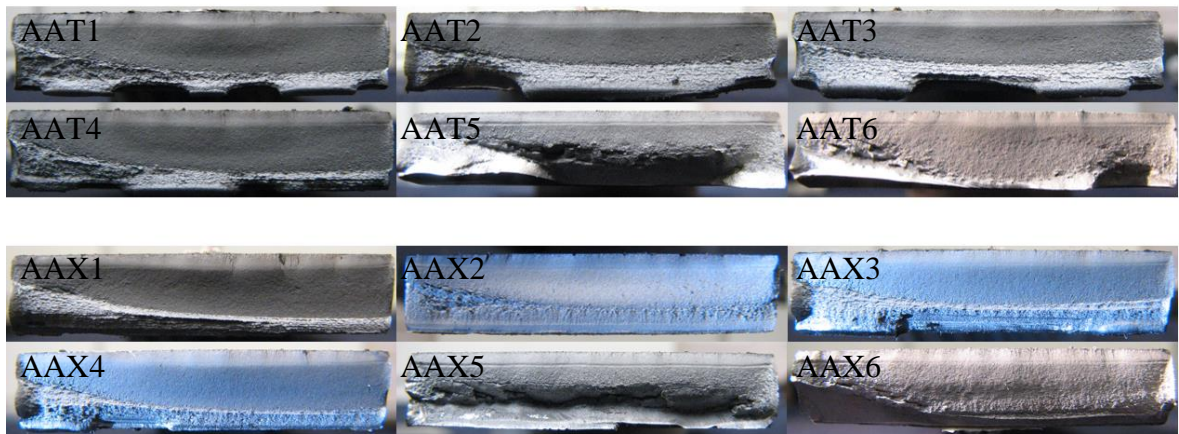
Fracture surfaces of tested specimens. Specimen IDs 1–4 are tested under bending and IDs 5–6 under tensile loading.
